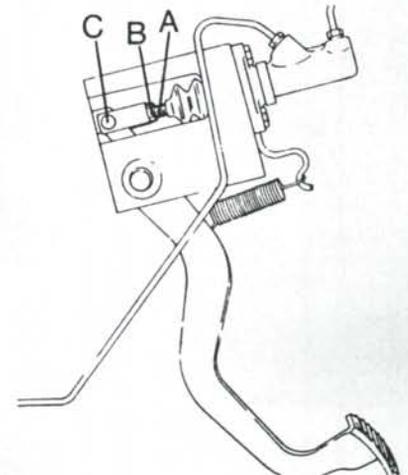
Remove pin (C) from rod (A) and loosen locknut (B), and adjust master cylinder as outlined in paragraph 215.
